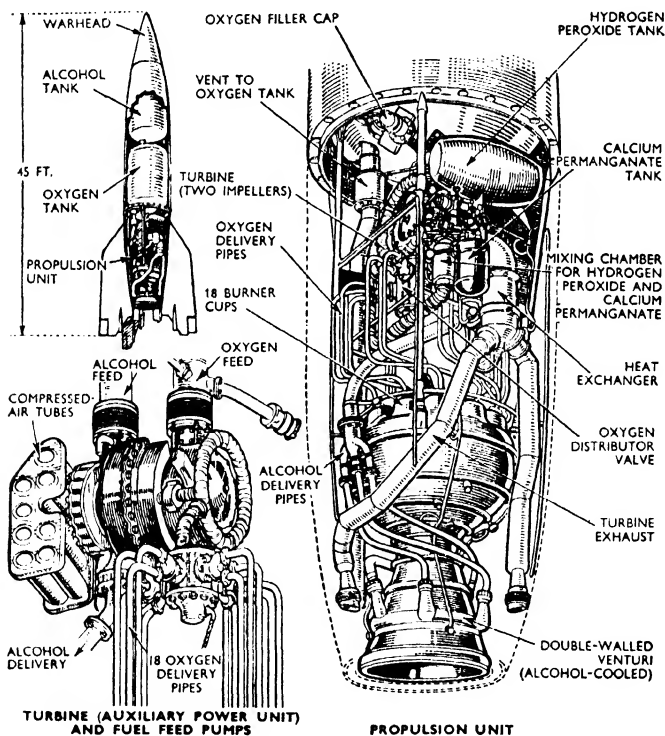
Part-section drawing with views of the auxiliary power and propulsion units, showing the constructional details of a V-2 rocket bomb.
